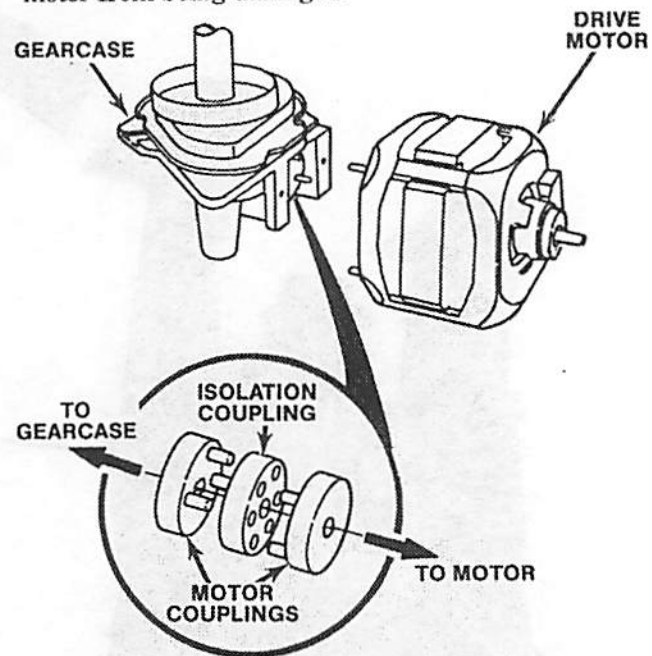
Isolation coupling is connected between the gearcase and motor.
